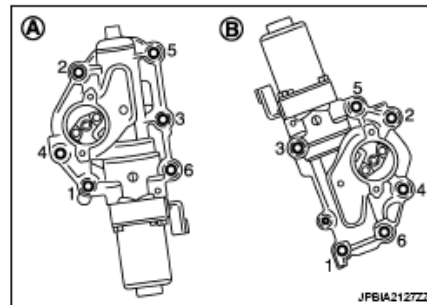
Identifying VVEL Actuator Sub Assembly Mounting Bolt Tightening Sequence
